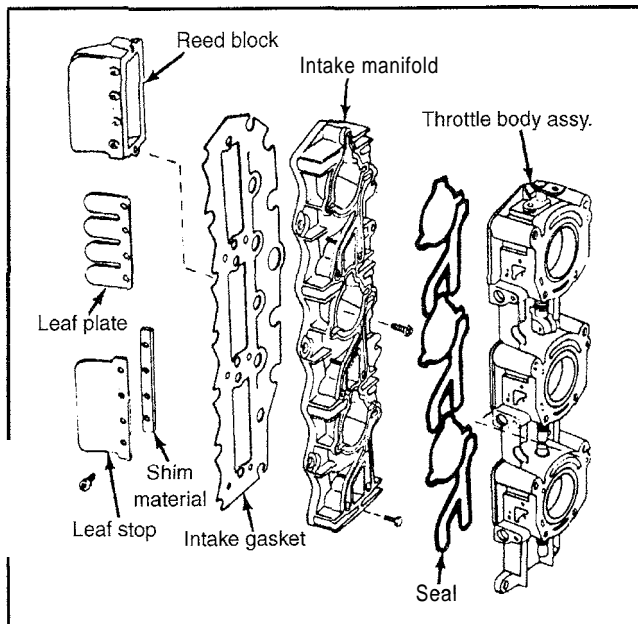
Serviceable leaf valve assemblies are used on cross-flow and 60° motors—a V6 is shown here, but the 60° V4 are very similar (the cross-flow uses a one-piece manifold design)
